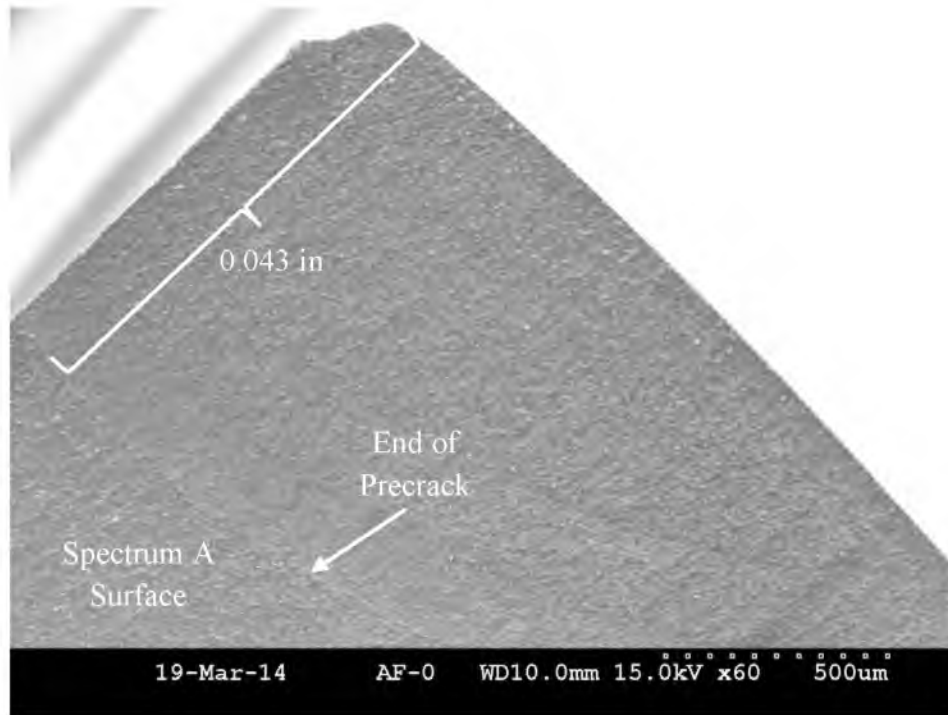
Wide View of GT270-14 Fracture Surface
